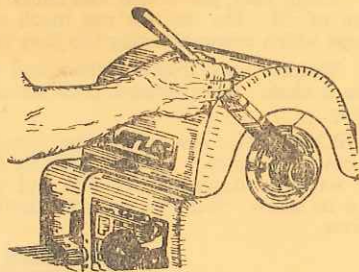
Bent wire filed on ends to a V-shape should be used to remove dirt and chips from chuck threads.
